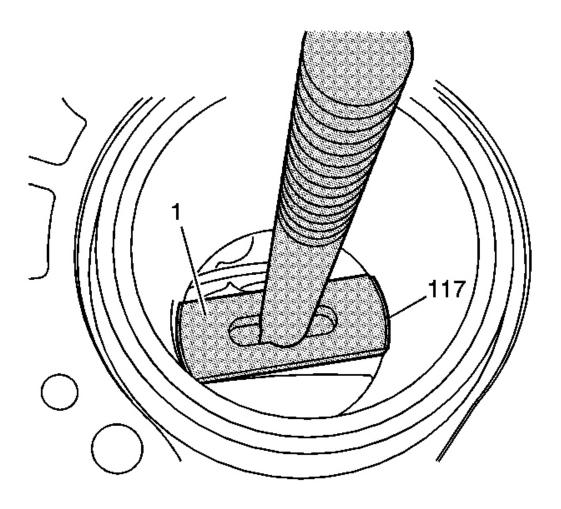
View Of Cylinder Bore Liner Puller Courtesy of GENERAL MOTORS CORP.
